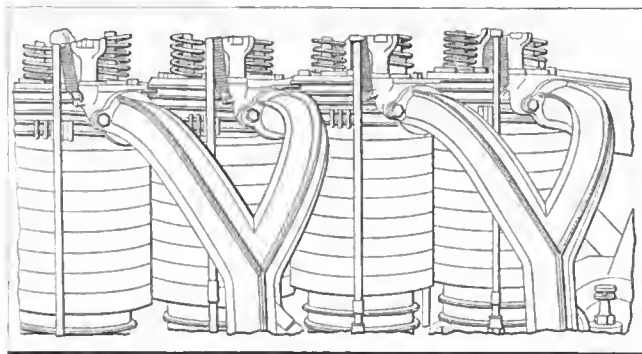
Y-shaped exhaust manifold used on an air-cooled motor, employing two units and requiring abrupt ends at the pipe
